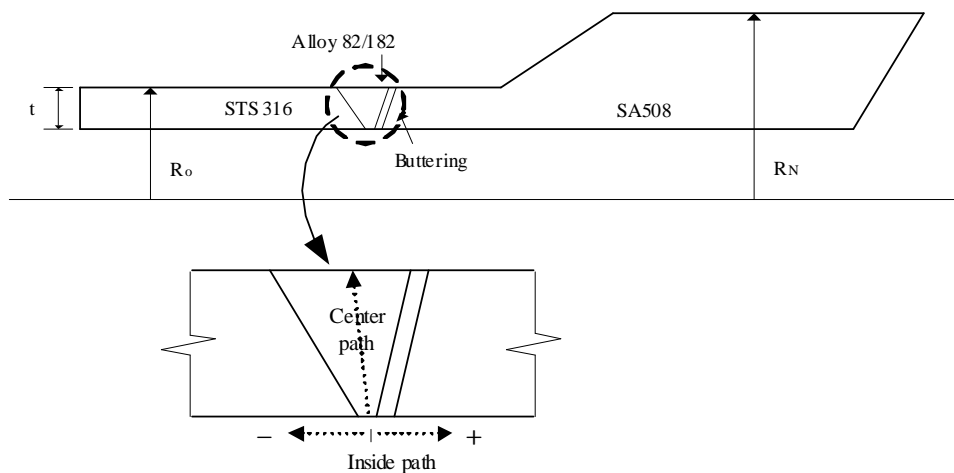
A Welding Zone of Dissimilar Metals and Prediction Paths in the Welding Zone for Data Acquisition
